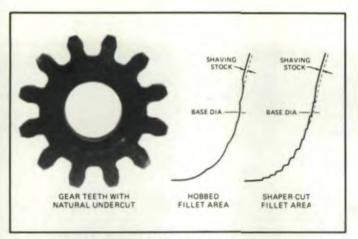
A 12-tooth pinion, left, showing natural shaper-cutter undercut. Enlarged fillets, right, show type of finish generated by hobbing and shaping.
